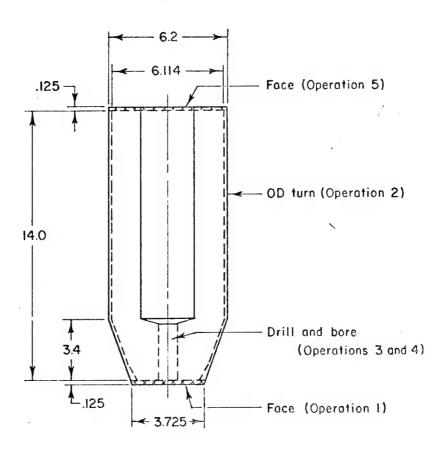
MACHINING OPERATIONS FOR HYDRAFILM EXTRUSION PREFORM
